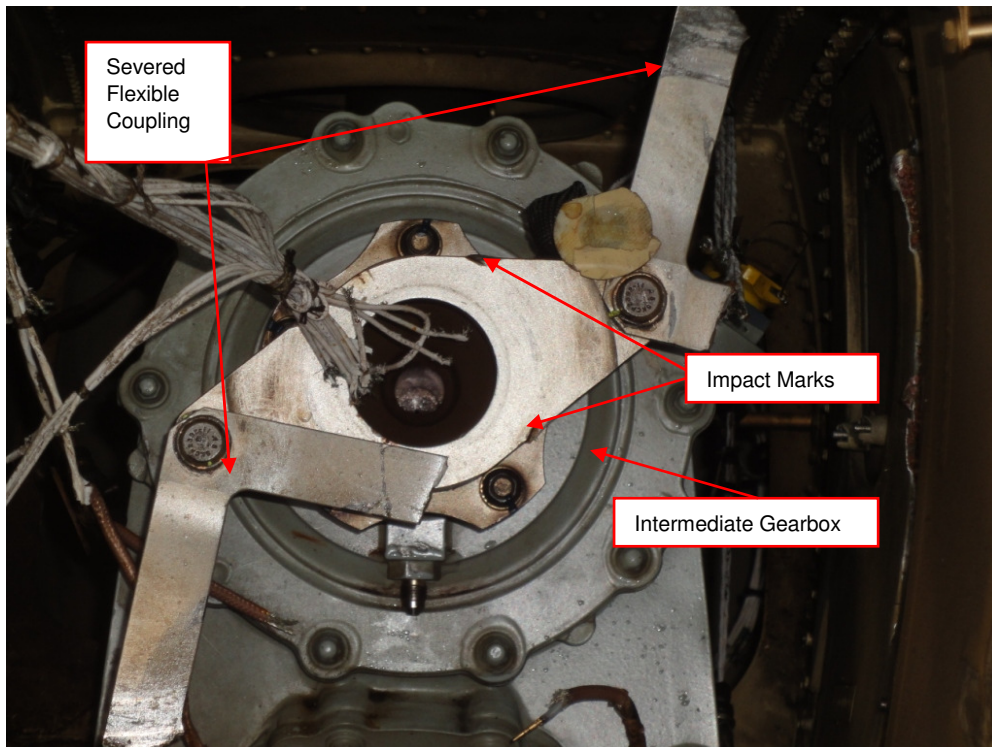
Impact marks on flexible coupling of intermediate gearbox
